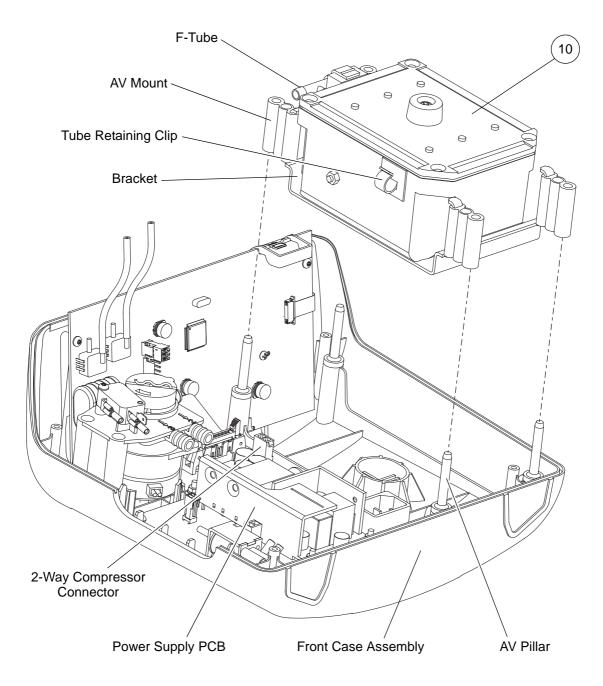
Replacing the Inlet Filter Felt on the Compressor Assembly
